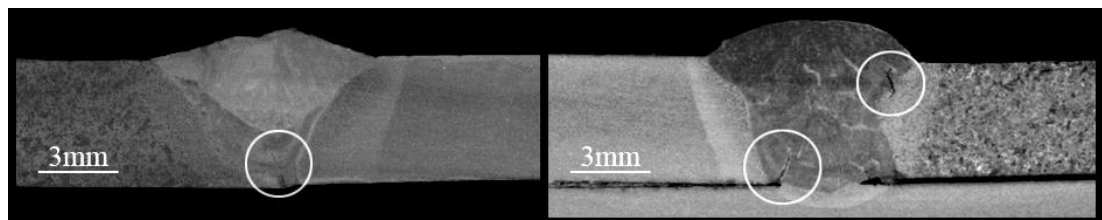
Macro photographs of the weld cross-sections. Cooling cracks are shown.
